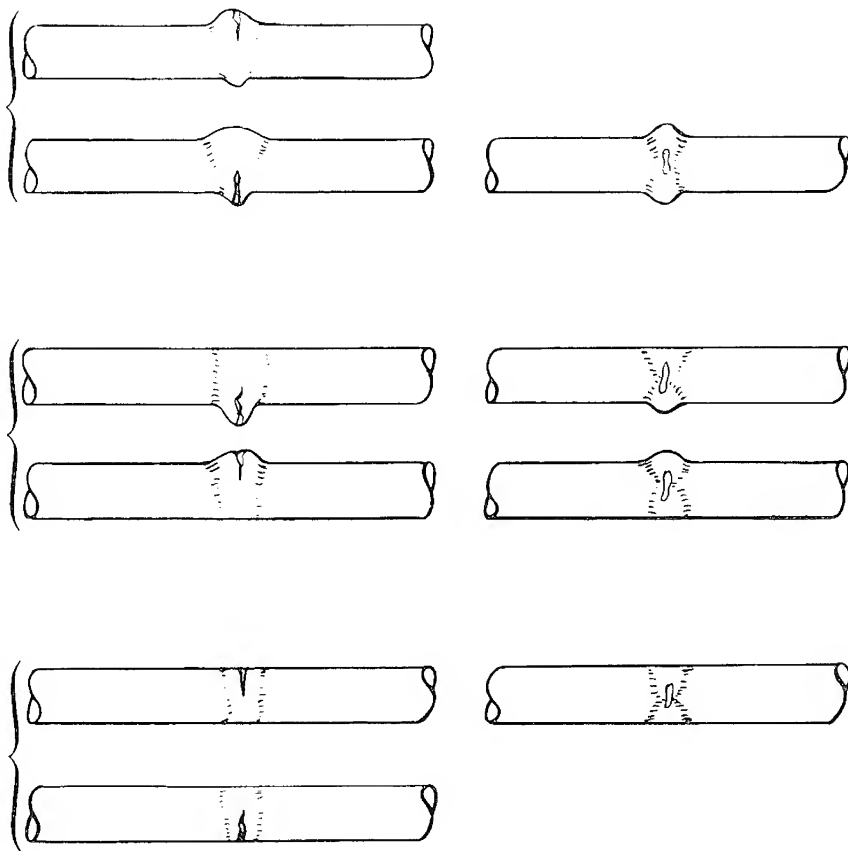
Flaw configurations (end view) for a butt fusion-welded joint.
